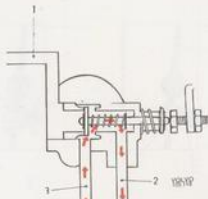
Principle, hot start valve with throttle control in idling position
